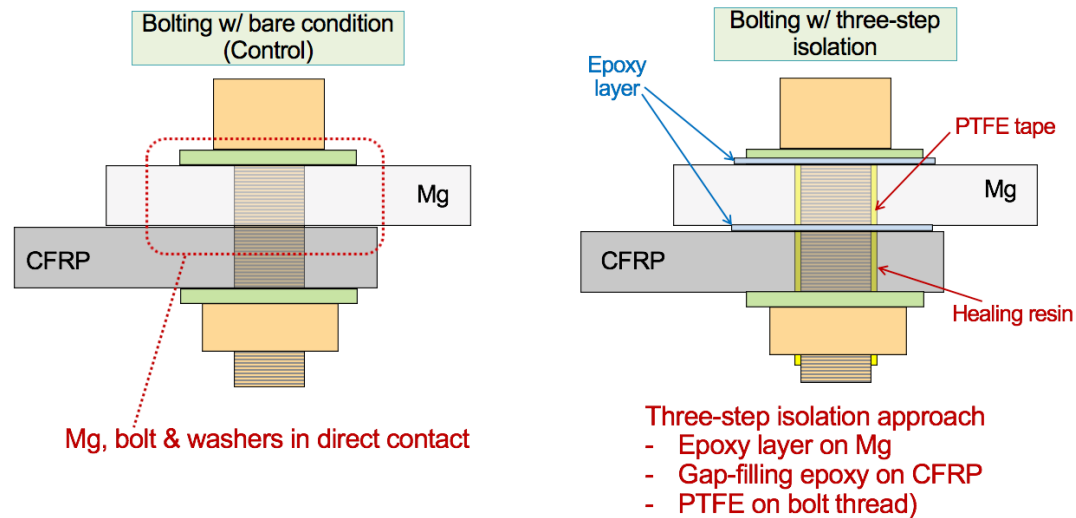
Schematic showing the locations of polymer coatings for the bolted joints.
